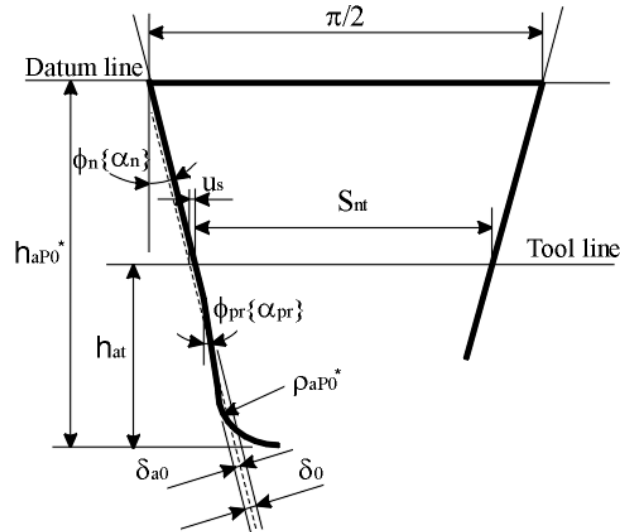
This figure shows a normal plane view of a rack-type generating tool (hob, rack cutter or generating grinding wheel).
